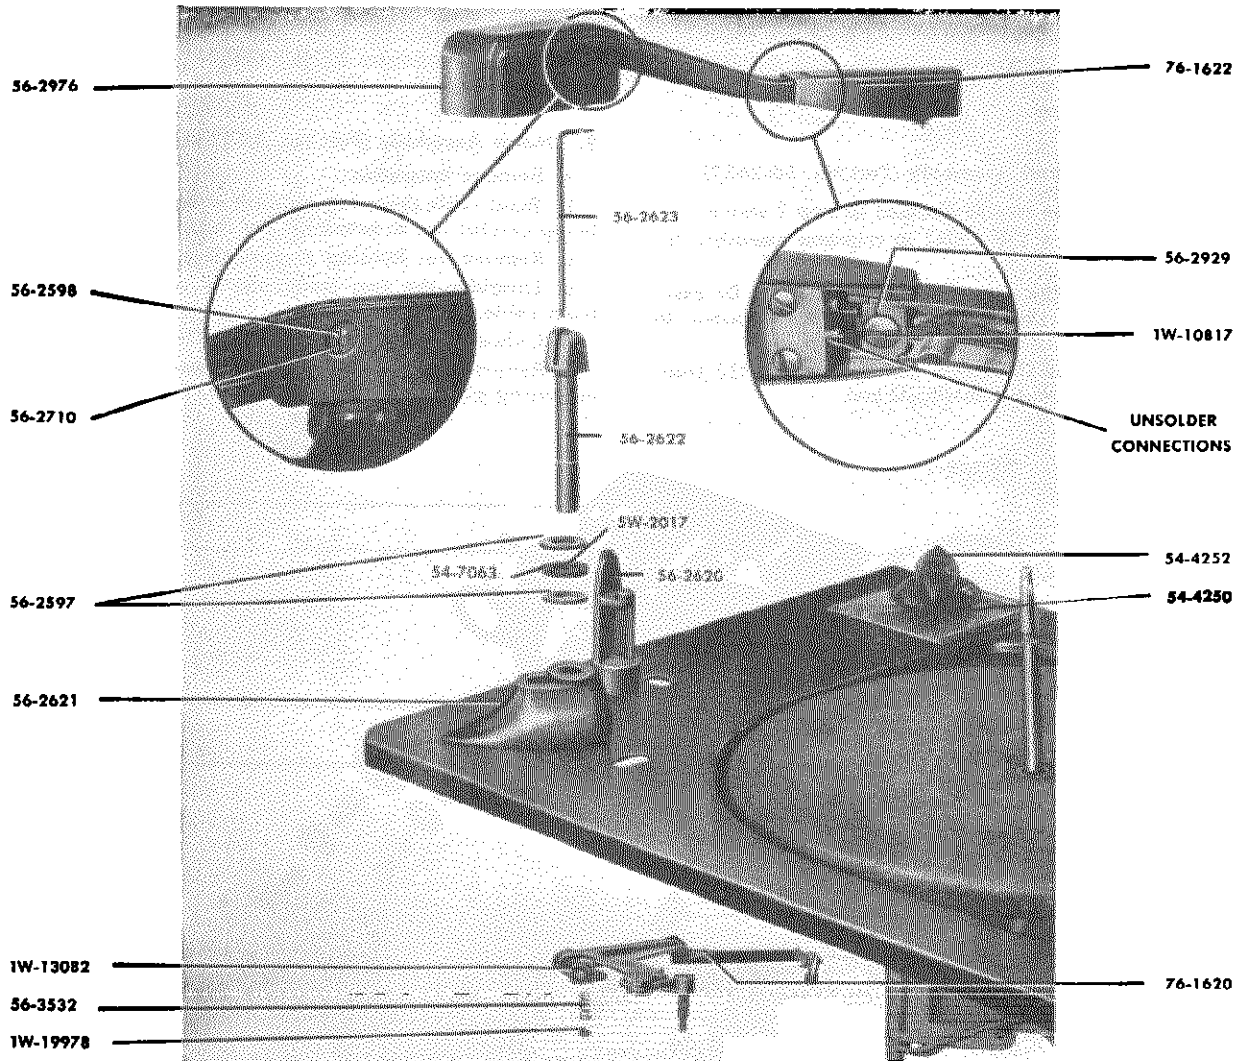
TONE-ARM-SHAFT AND TRIP-ARM ASSEMBLIES, EXPLODED VIEW.
